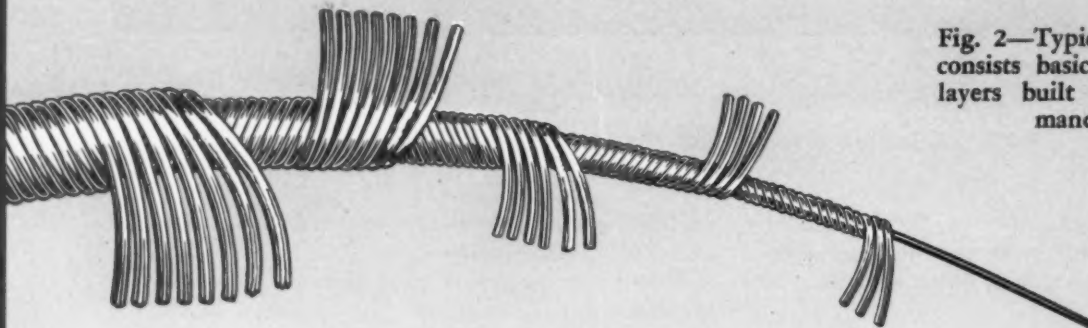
Typical flexible shaft consists basically of alternate layers built up from single mandrel wire
